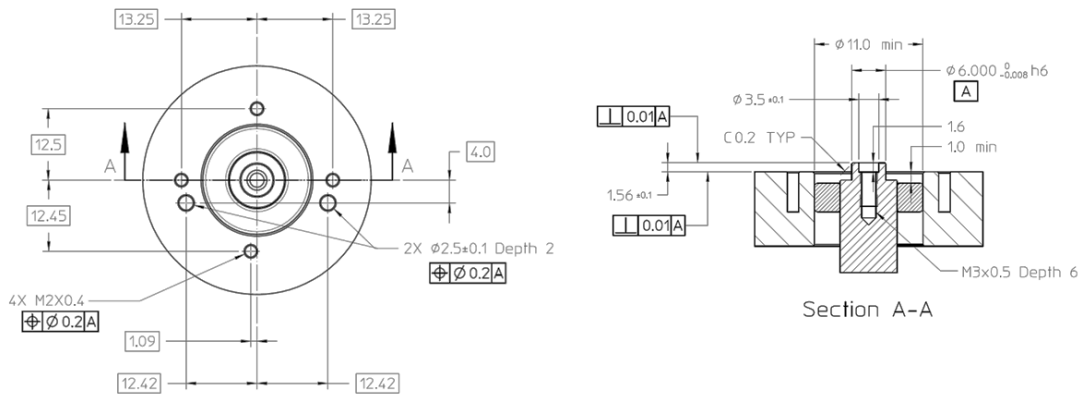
M4 Mounting Design Guidelines for Bottom Shield (Left) and Magnet/Hub (Right)
